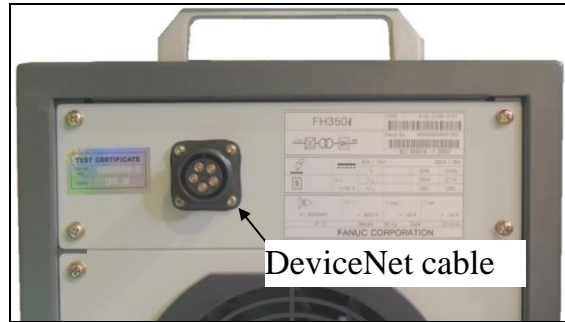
(d) Connection of DeviceNet cable (Welding power supply FH350i)
